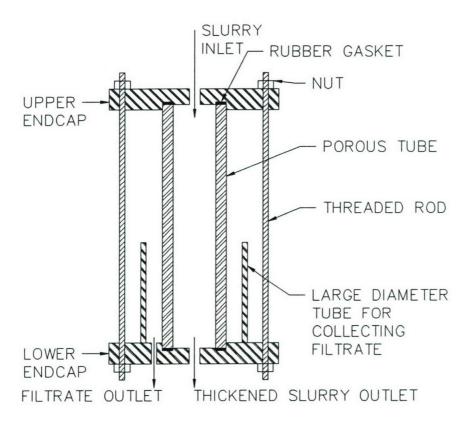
Sectional view of porous tube held in compression between two endcaps.
